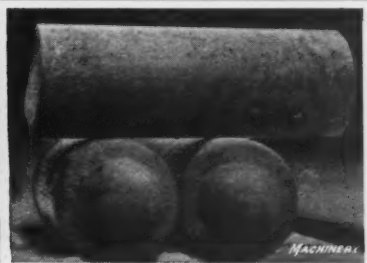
Side View of Billet shown to Right in Fig. 3, showing Appearance of Break
